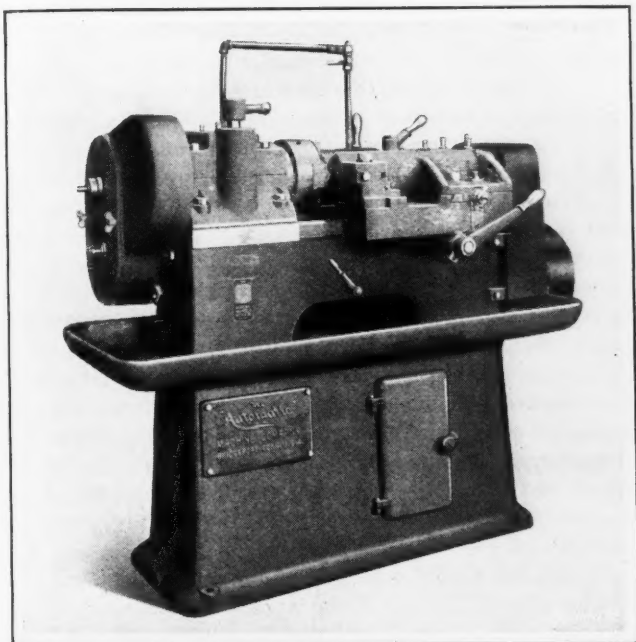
Coulter Duplex-hob Thread-milling Machine for Wrench Jaws
